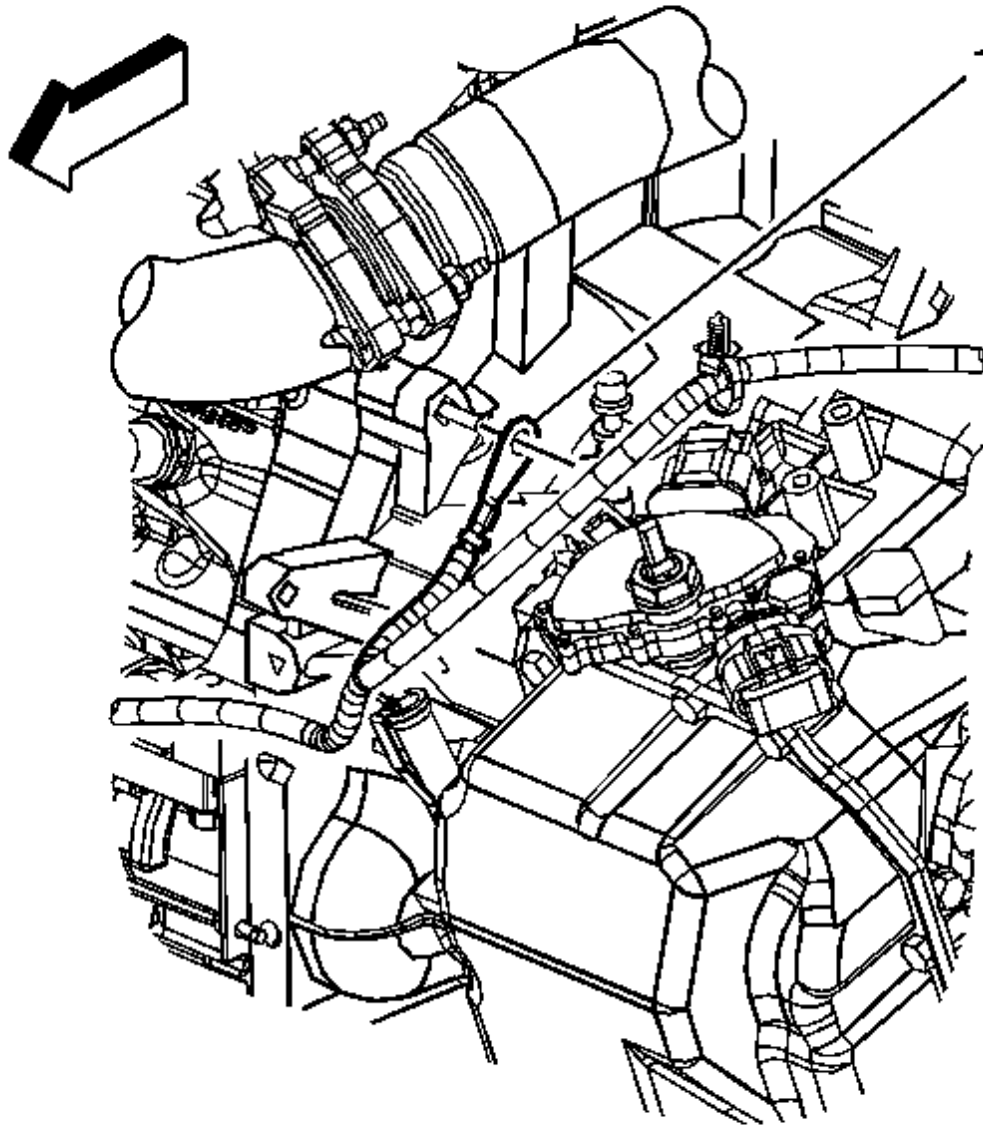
View Of Negative Battery Cable At Transaxle Stud
